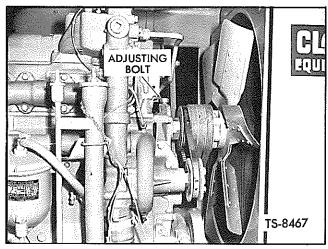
Check Fan Belt Tension — Cummins Diesel
